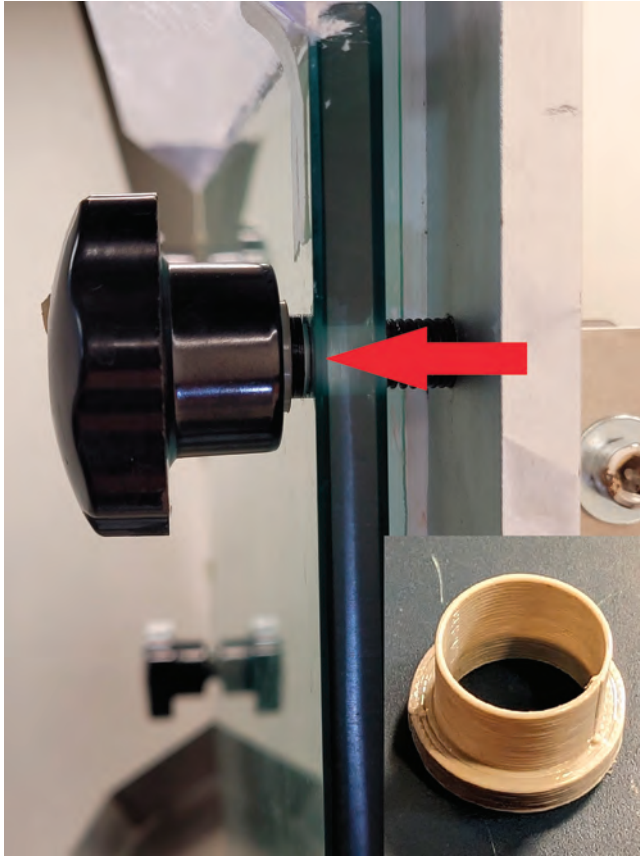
3D printed bushing for pupal separator installed on pupal separator as well as standalone part (bottom right).
